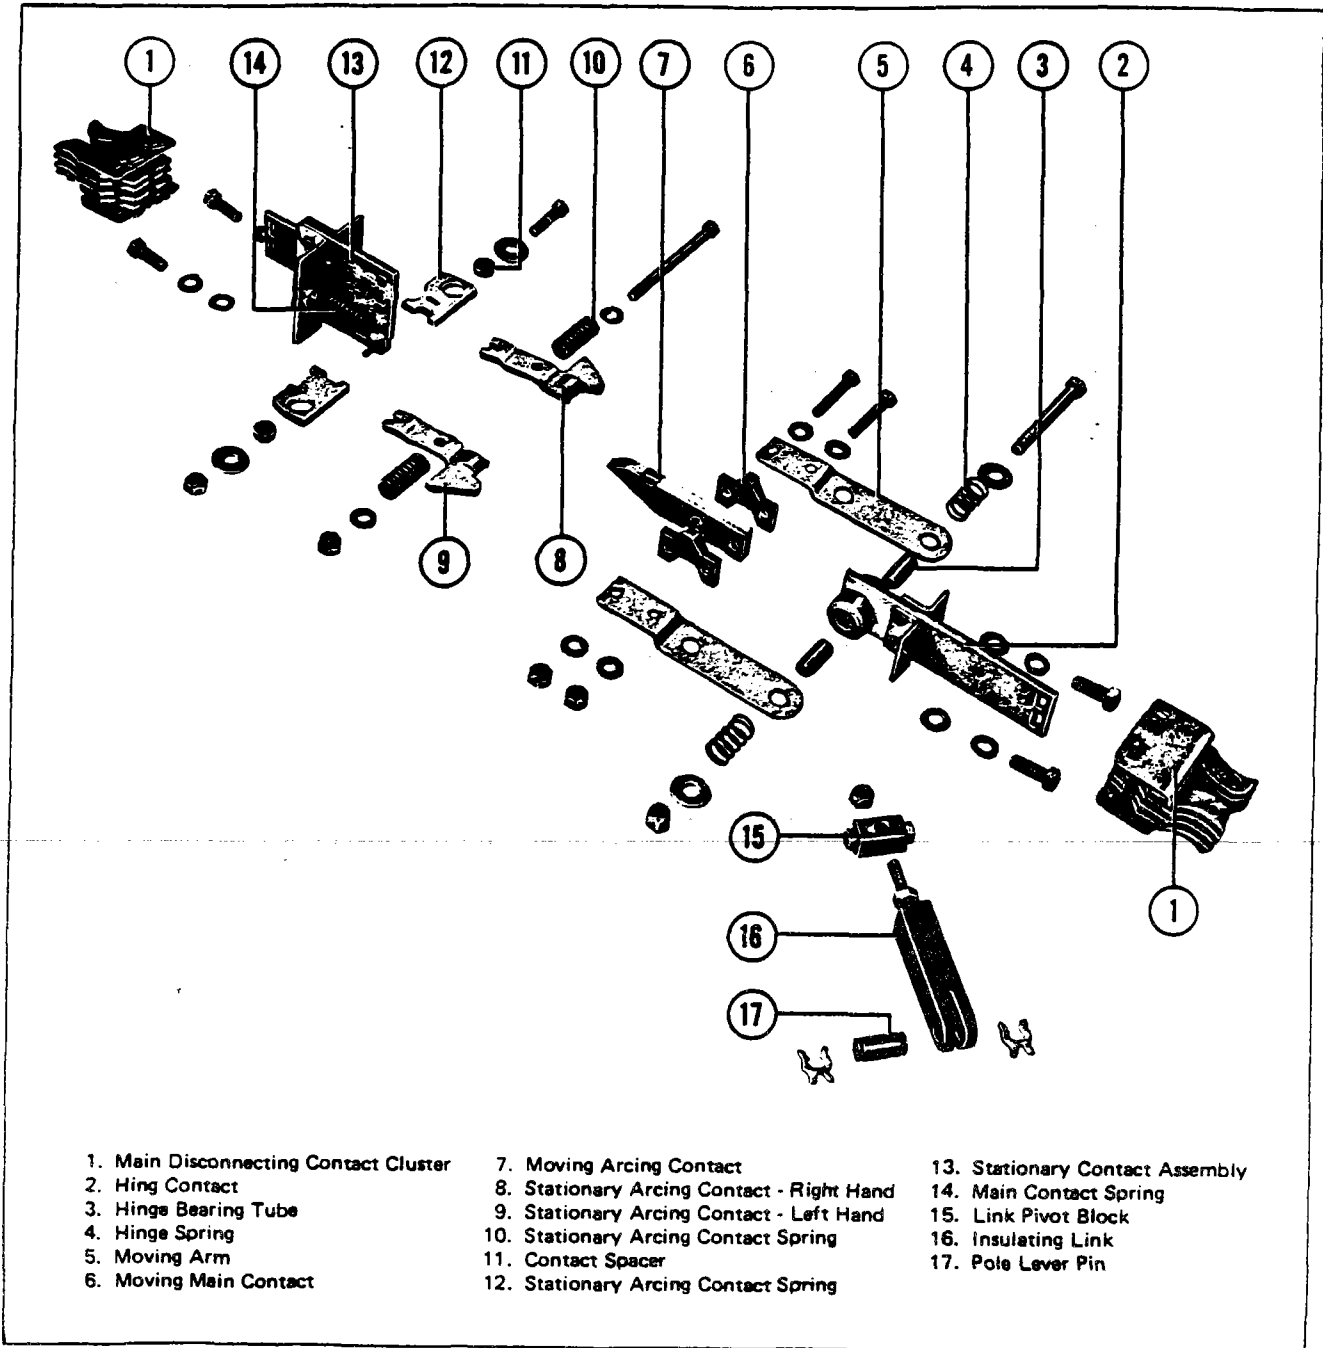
Moving and Stationary Contact Details DS-206 (383979)
